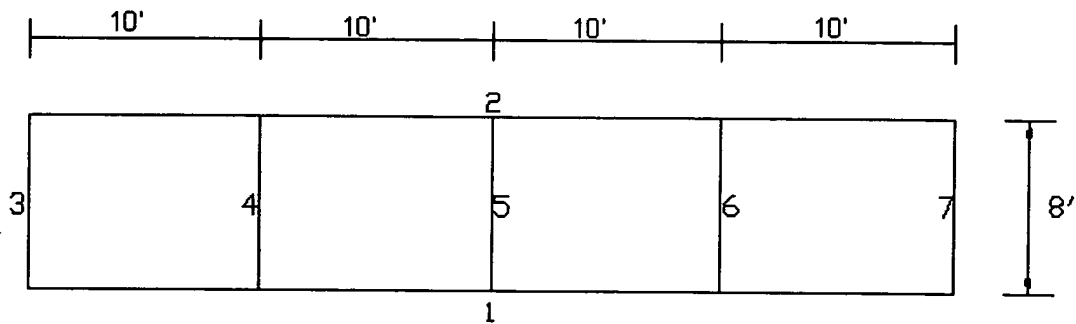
A/B: The ceiling frame panel structure model (40 foot and 40 foot high cube collapsible container)
